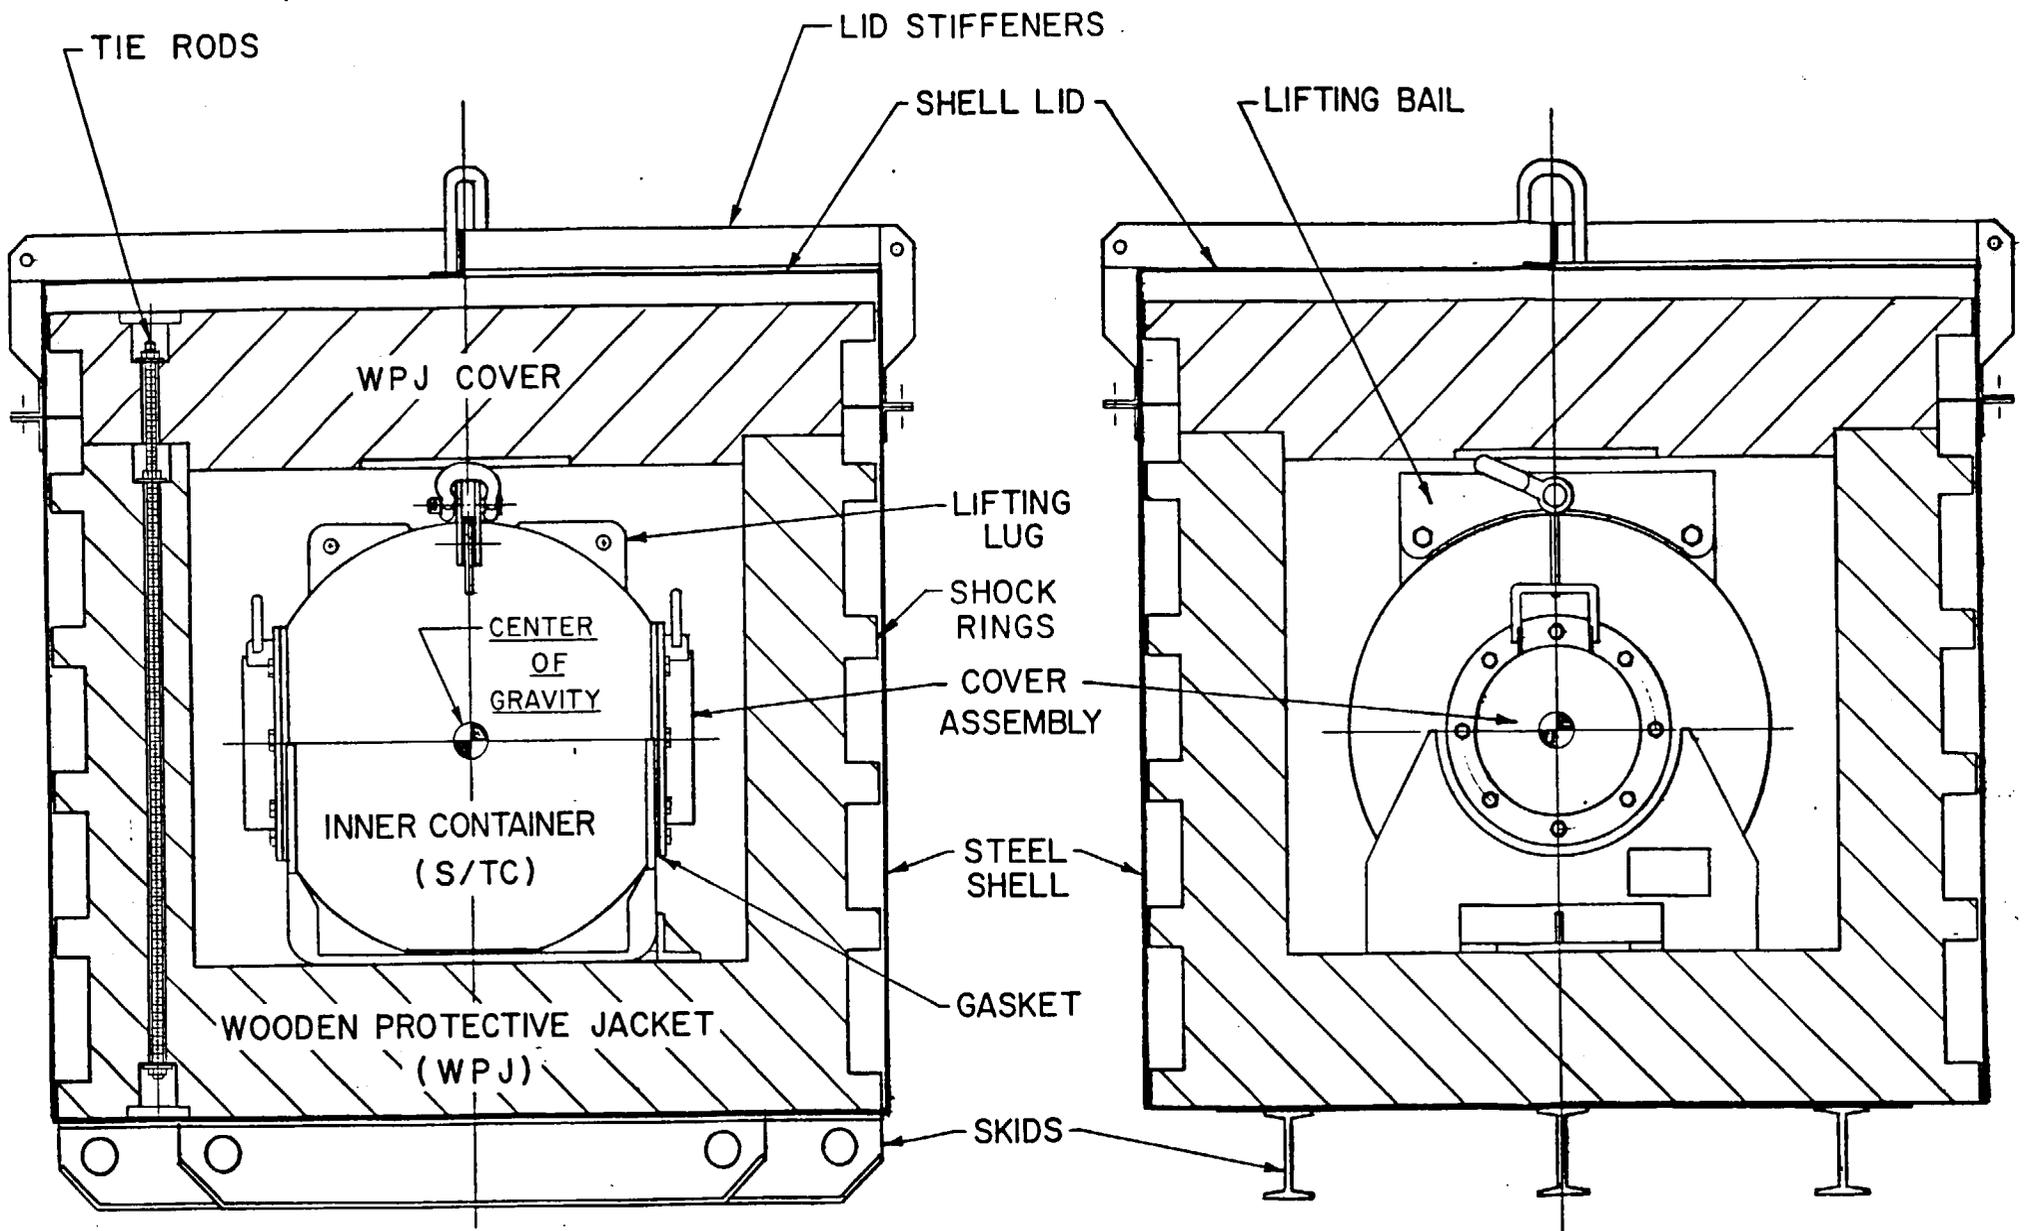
is a section drawing of the package showing the S/TC inner container in place and the principal structural components.
